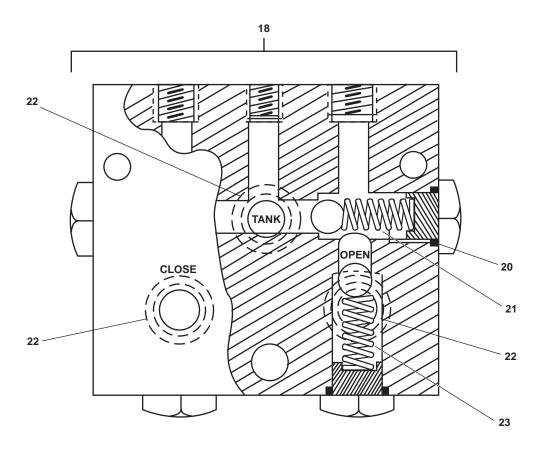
Hydraulic Watertight Doors (Sheet 5 of 9)
